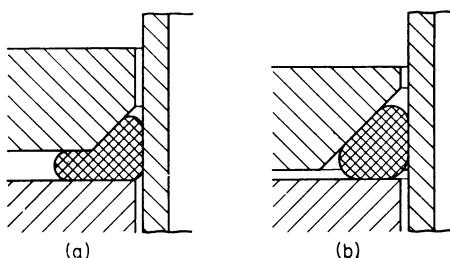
Conical seals: (a) with dimension A (Fig. 3.81) less than optimum; (b) with dimension A more than optimum
